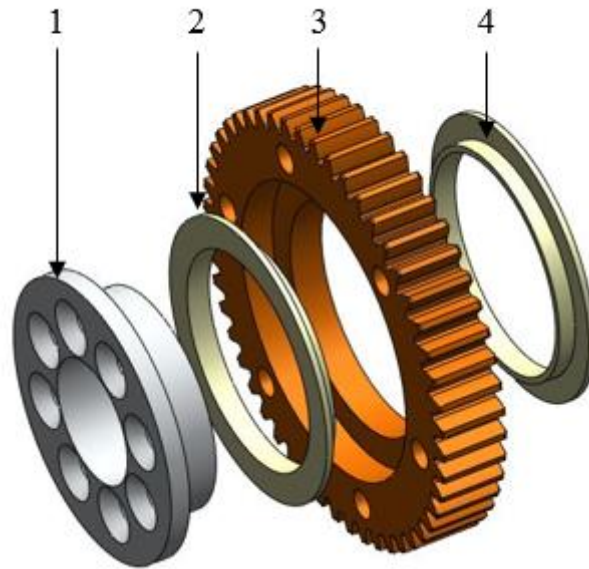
Slew bearing design with (1) connecting hub, (2) 3D printed bushing, (3) driver gear, and (4) 3D printed bushing
